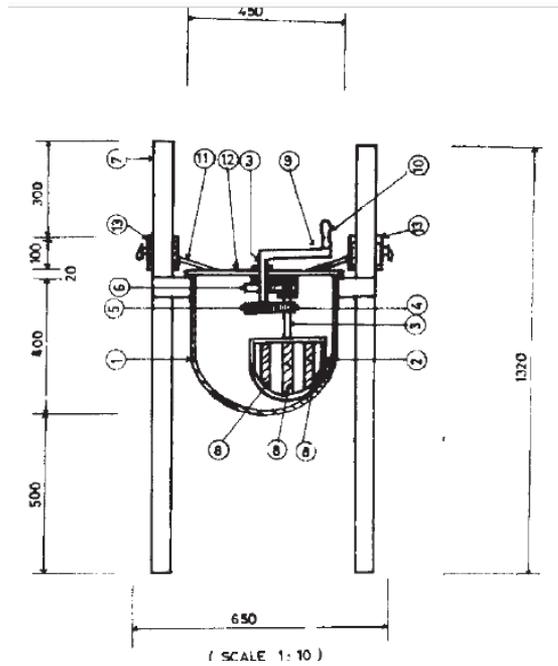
Sectional view of the Milled Shea Nut Mixer
